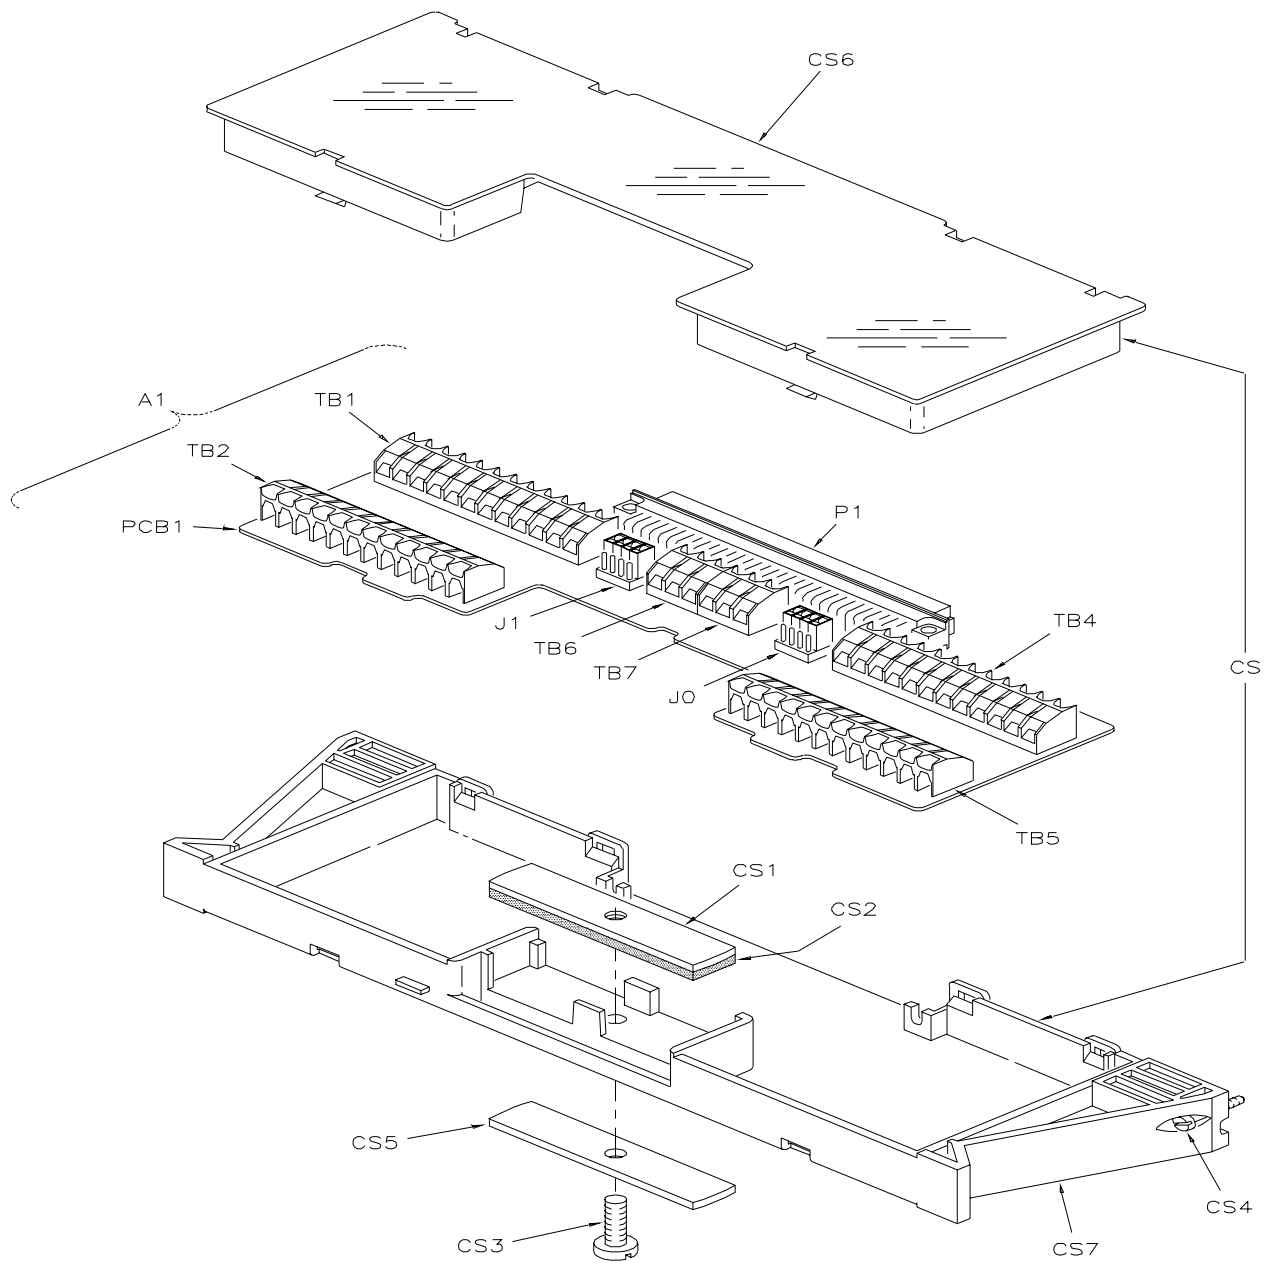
E1355A/56A Terminal Module Mechanical Parts
